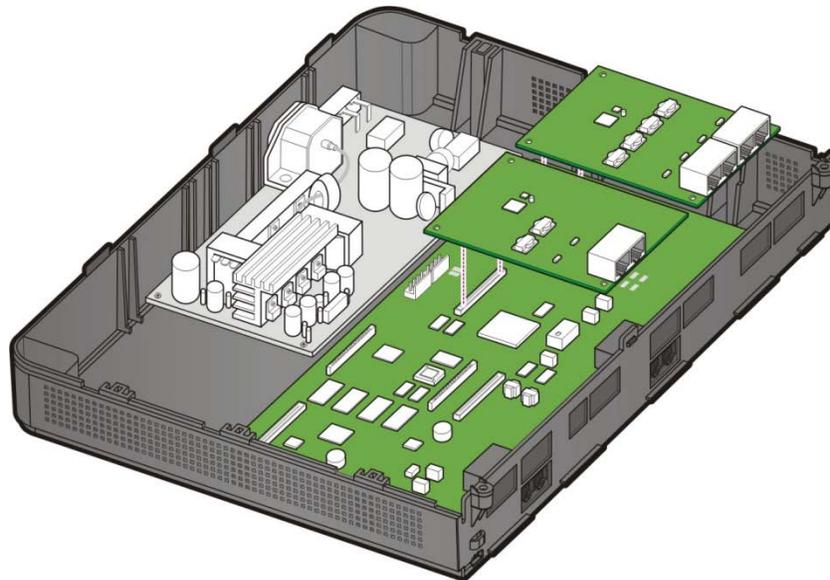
Mounting 2DM/4DM/4SM/4LM on the Base Board
